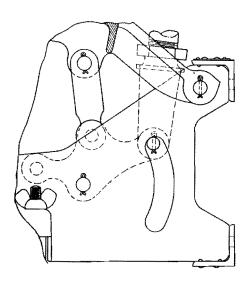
Accelerating Device Showing Assembly for Above and Below Floor Mounting
